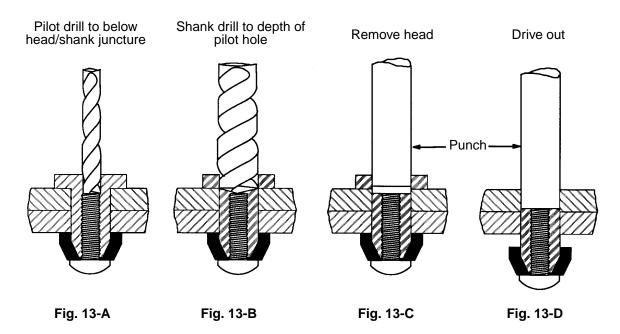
Nut Drill-Out Removal of Jo-Bolts
